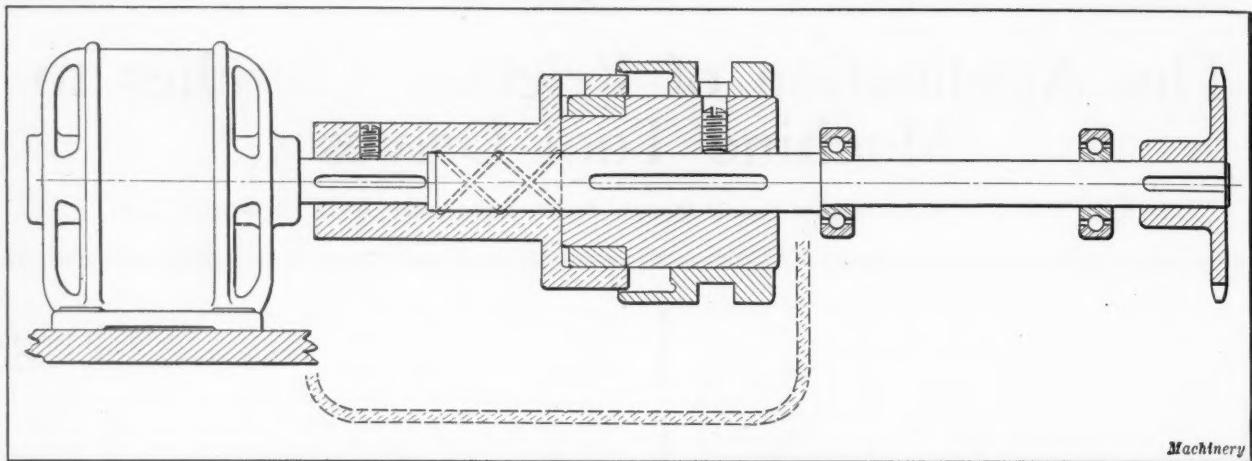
Friction Clutch employed as a One-way Cut-off Coupling between a Motor and the Machine driven by it
